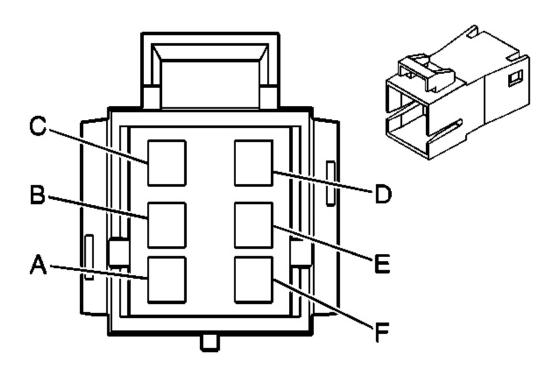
Seat Motors - Passenger (AG2) Connector End Views Courtesy of GENERAL MOTORS CORP.
